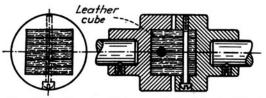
Another design made by Charles Bond Company. The flanges have square recesses into which a built-up leather cube fits. Endwise movement is prevented by through bolts used where low torque loads are to be transmitted.
